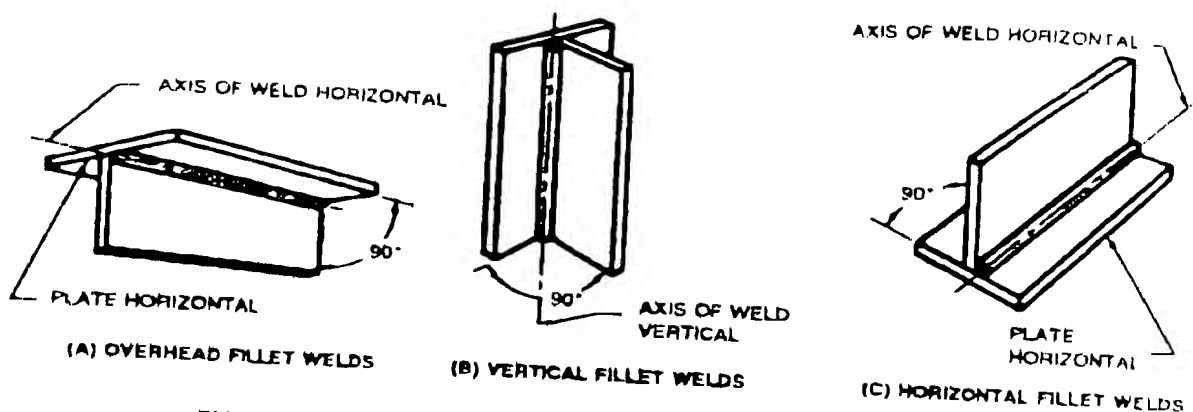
WELDING POSITIONS FOR FILLET WELD TEST ASSEMBLIES
